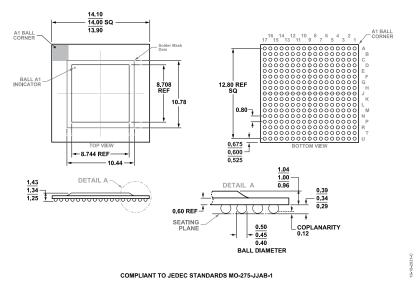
289-Ball Chip Scale Package Ball Grid Array [CSP\_BGA] (BC-289-3) Dimensions shown in millimeters
